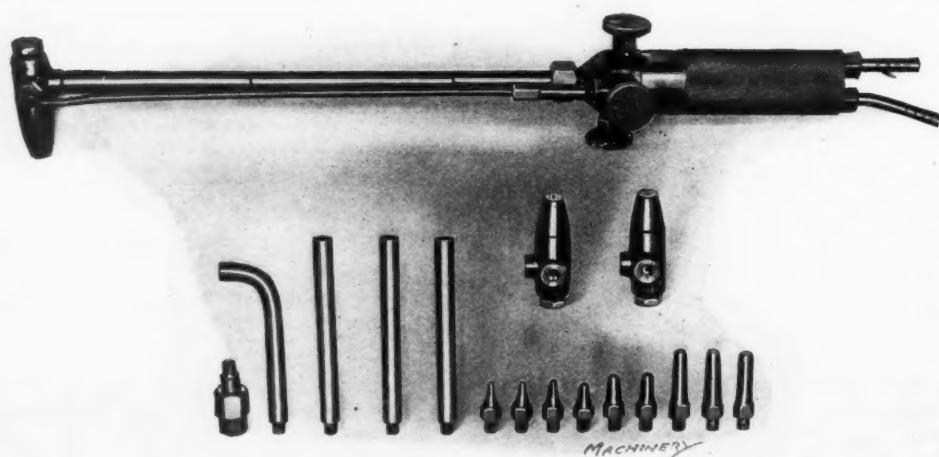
"Hoover" Torch with Head mounted in Right-angle Position
